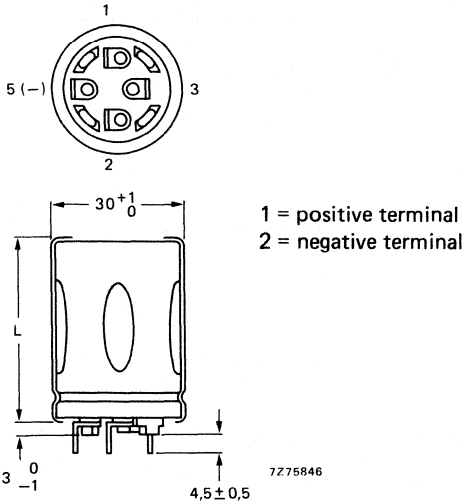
Capacitor with printed wiring pins; see Table 4 for dimension L.
